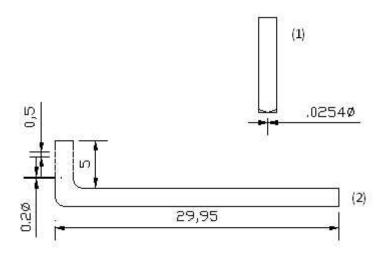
(1) Dimensions of injector (in millimeter) (2) Dimensions of pipe inside reactor to get out vapor methanol (in millimeter)
